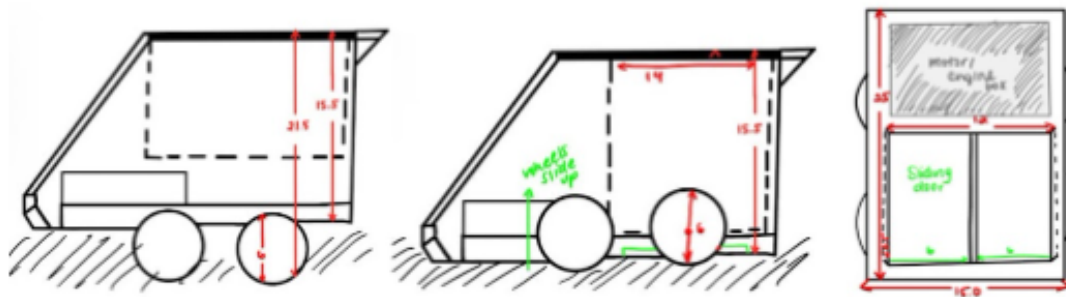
Original Dimensions Figure 2: Modified Dimensions Figure 3: Accessory Dimensions
